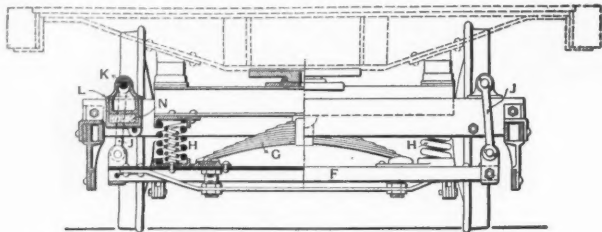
Half Cross-Section and Half End Elevation—14A Truck.
